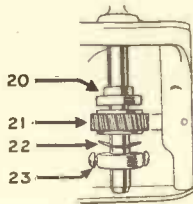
THE FRICTION CLUTCH OF THE 330 TURNABLE MOTOR.
